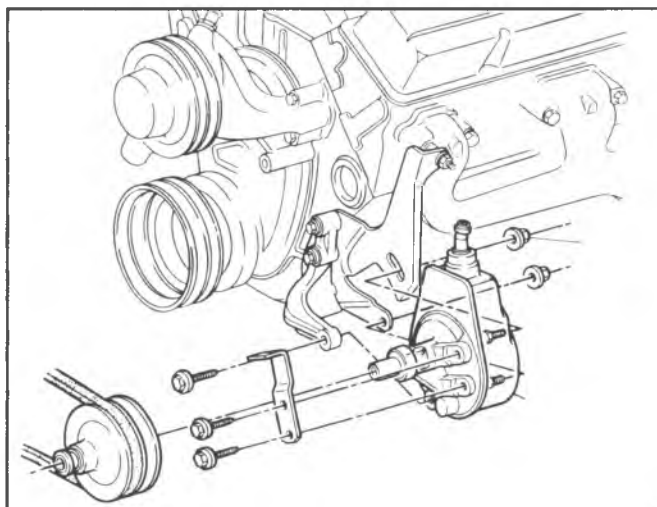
B3-25--P/S Pump Mounting; P200, P300 (32)
